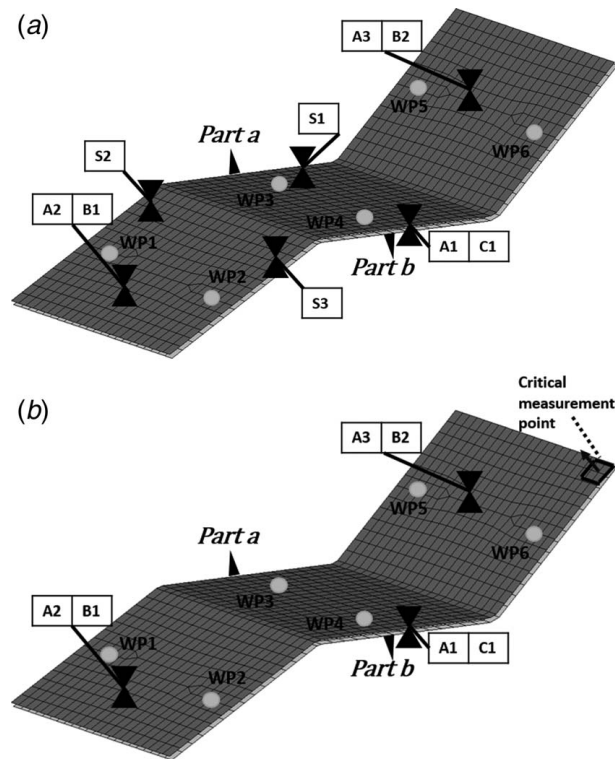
Example of a two-sheet assembly with a critical point of measurement: (a) in assembly fixture and (b) in inspection fixture
